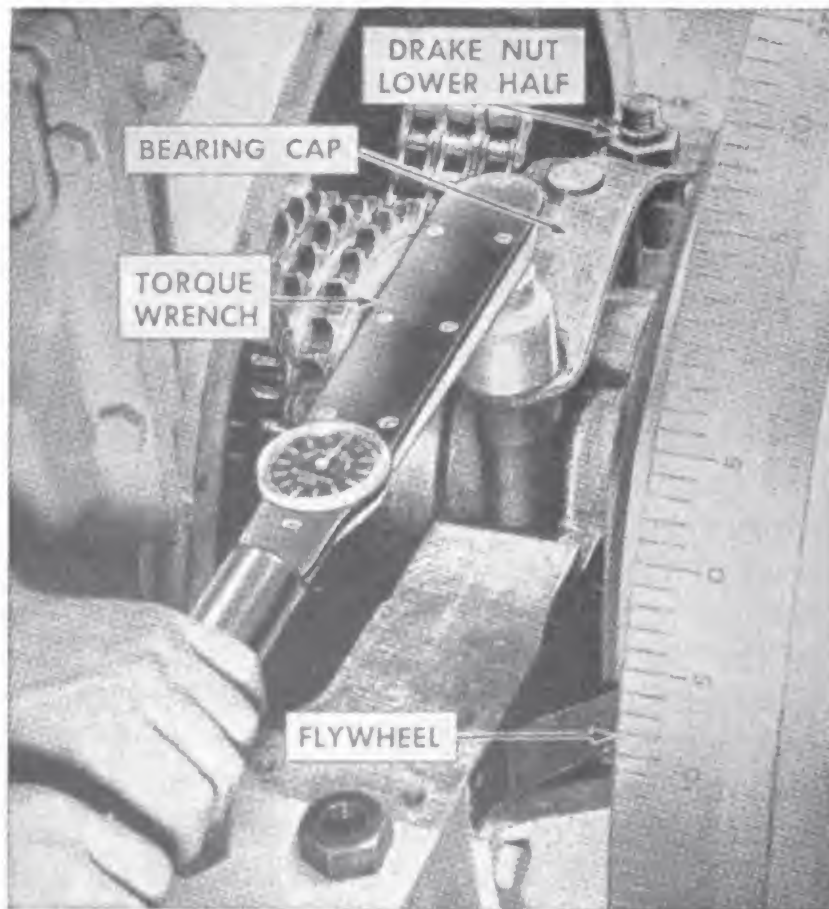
Using a torque wrench to tighten a main bearing.
